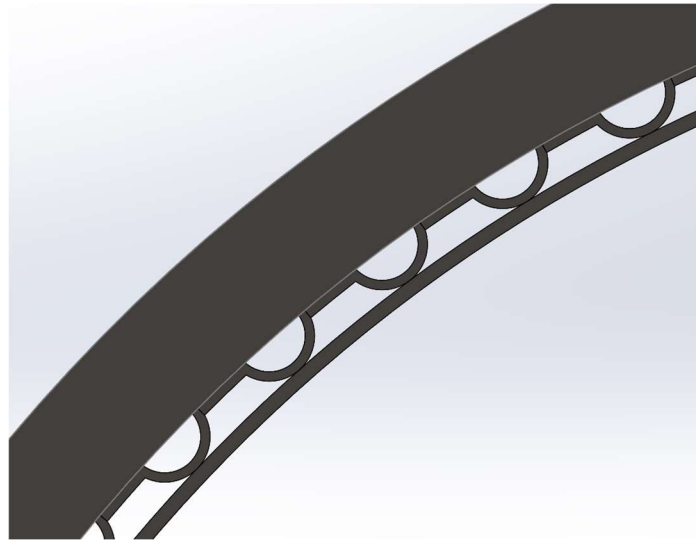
Zoomed in picture of a solid model of Foil Bearing
